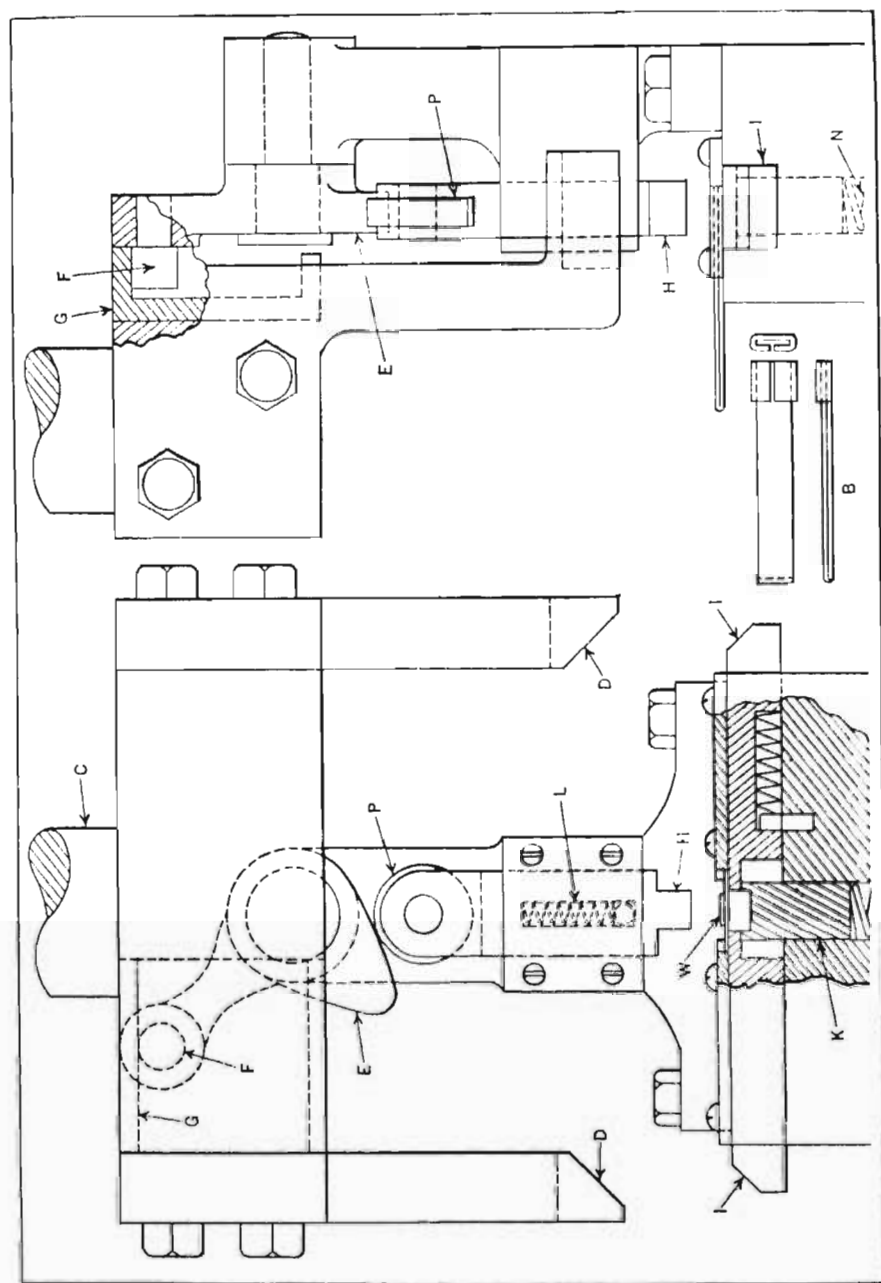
Folding Die with Pivoted Cam for Rapidly Advancing and Withdrawing Plunger H in Advance of Cams D
